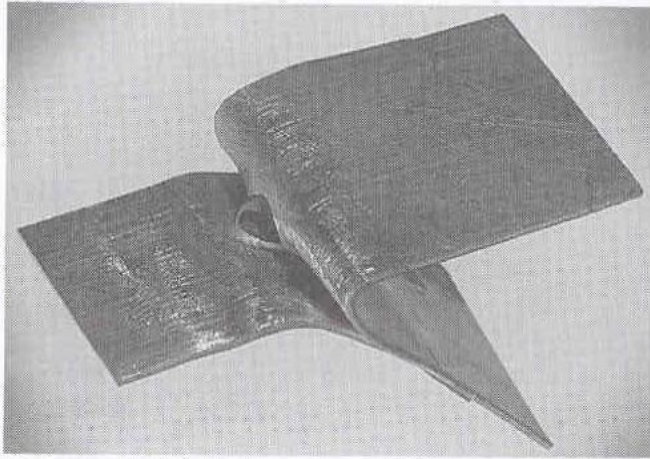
Tear test of a satisfactory spot weld, showing how failure occurs outside of the weld.
